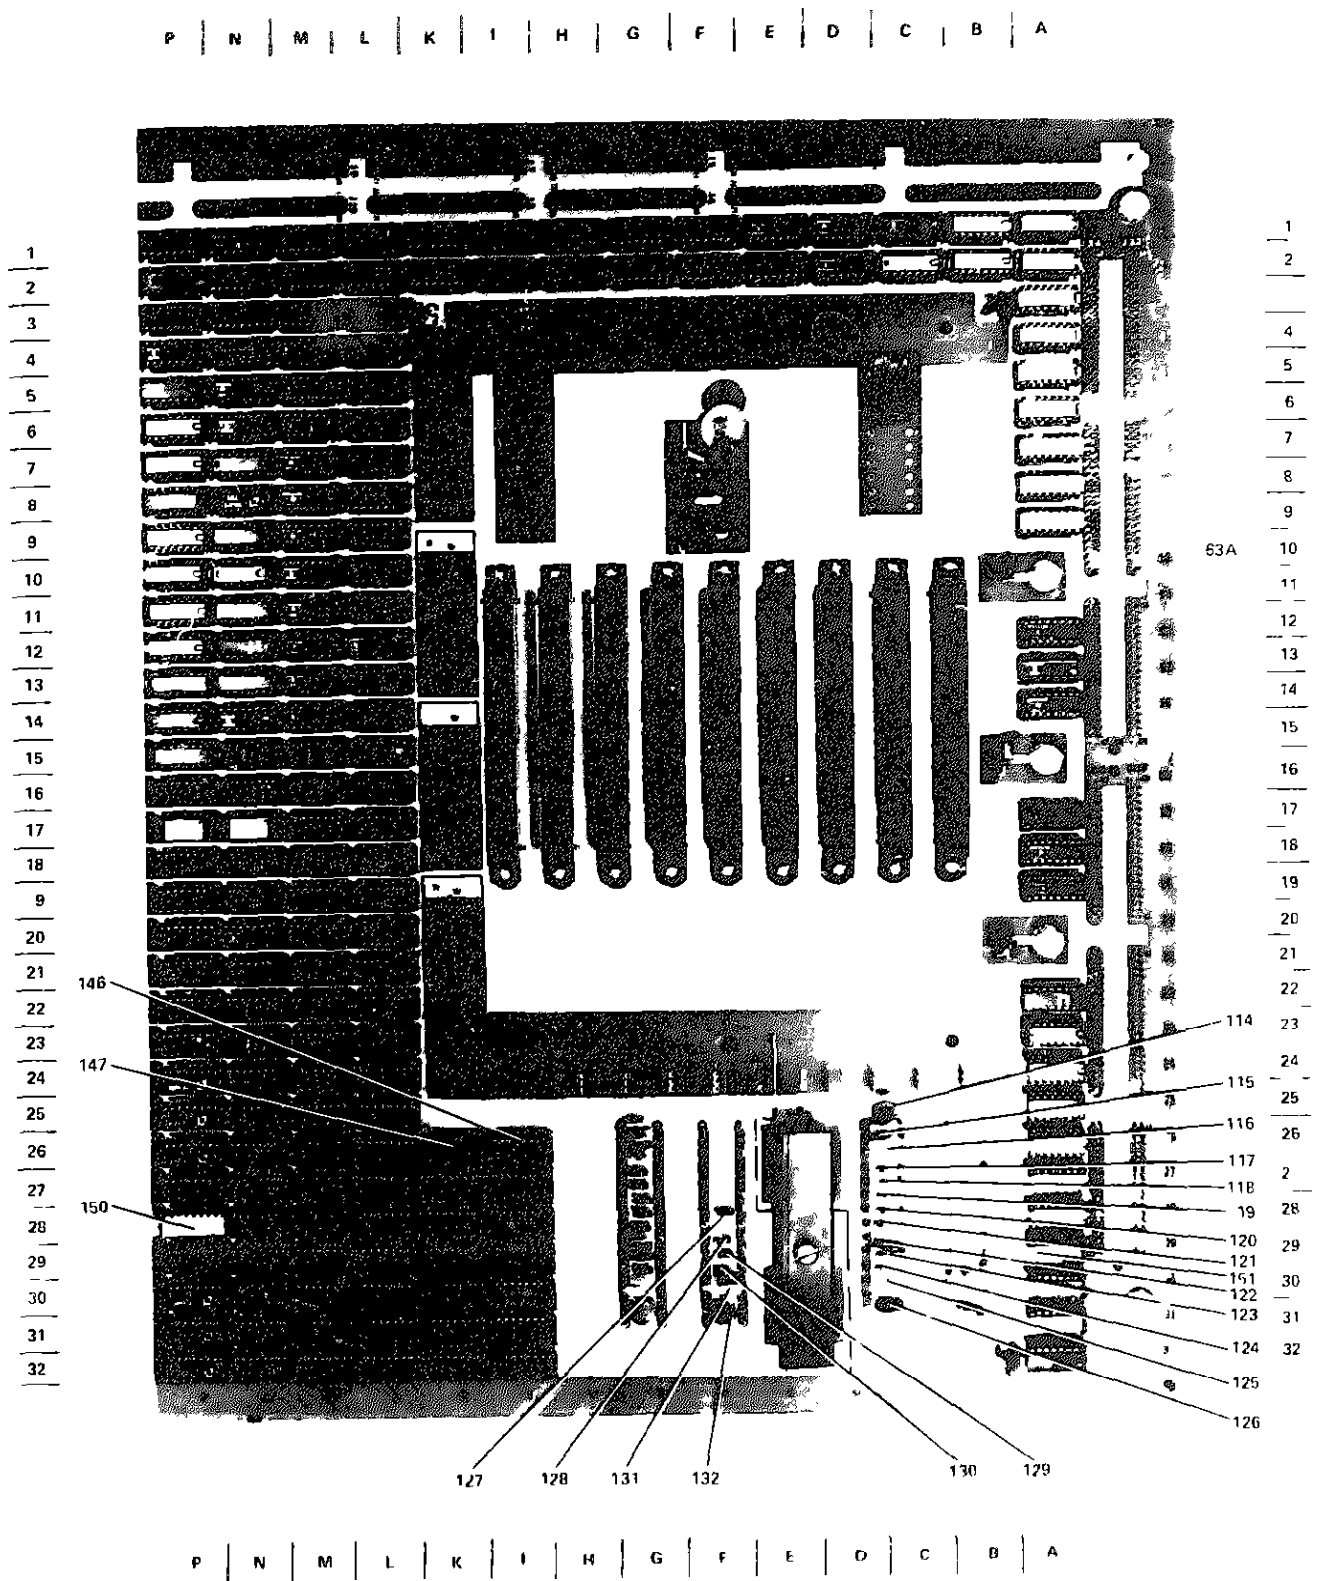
Main Wire Wrap Board Assembly (A) (Sheet 1 of 1)
